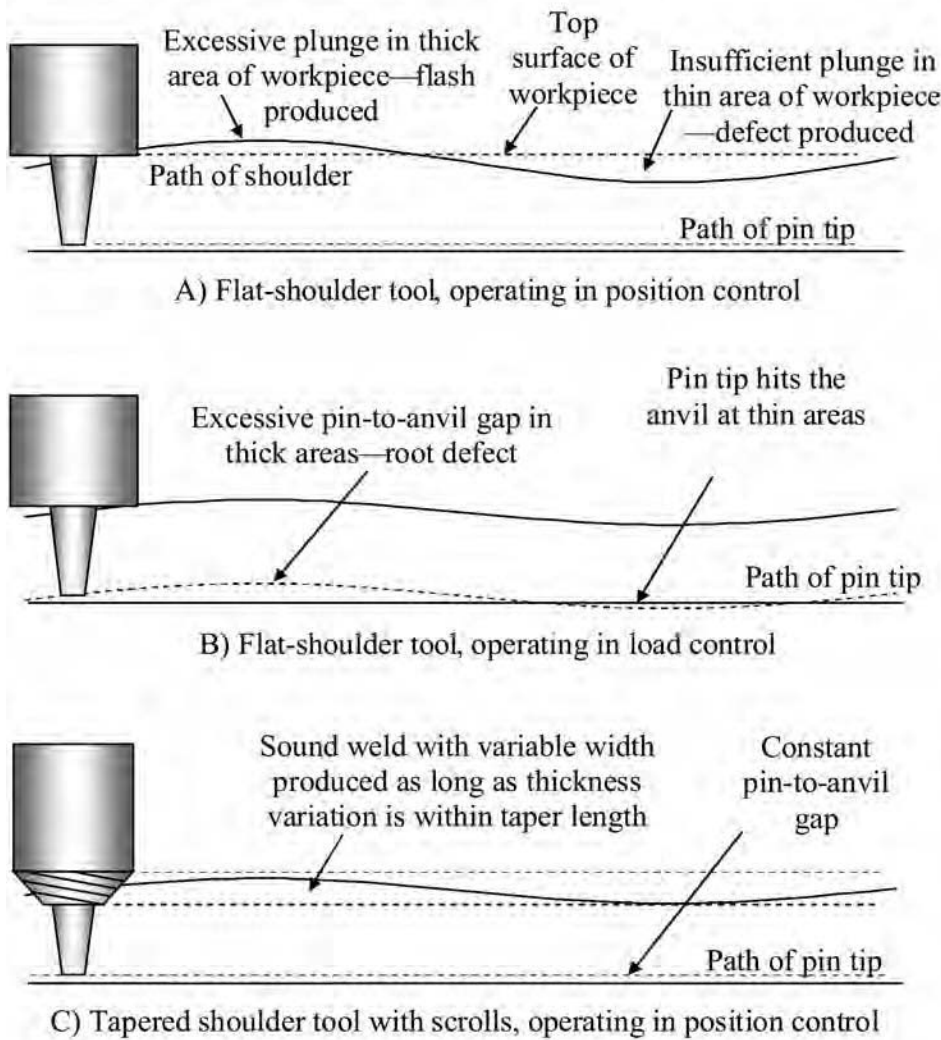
Tapered-shoulder workpiece showing how a convex scrolled shoulder can accommodate variable workpiece thicknesses. Courtesy of Kevin Colligan, Concurrent Technologies Corporation
